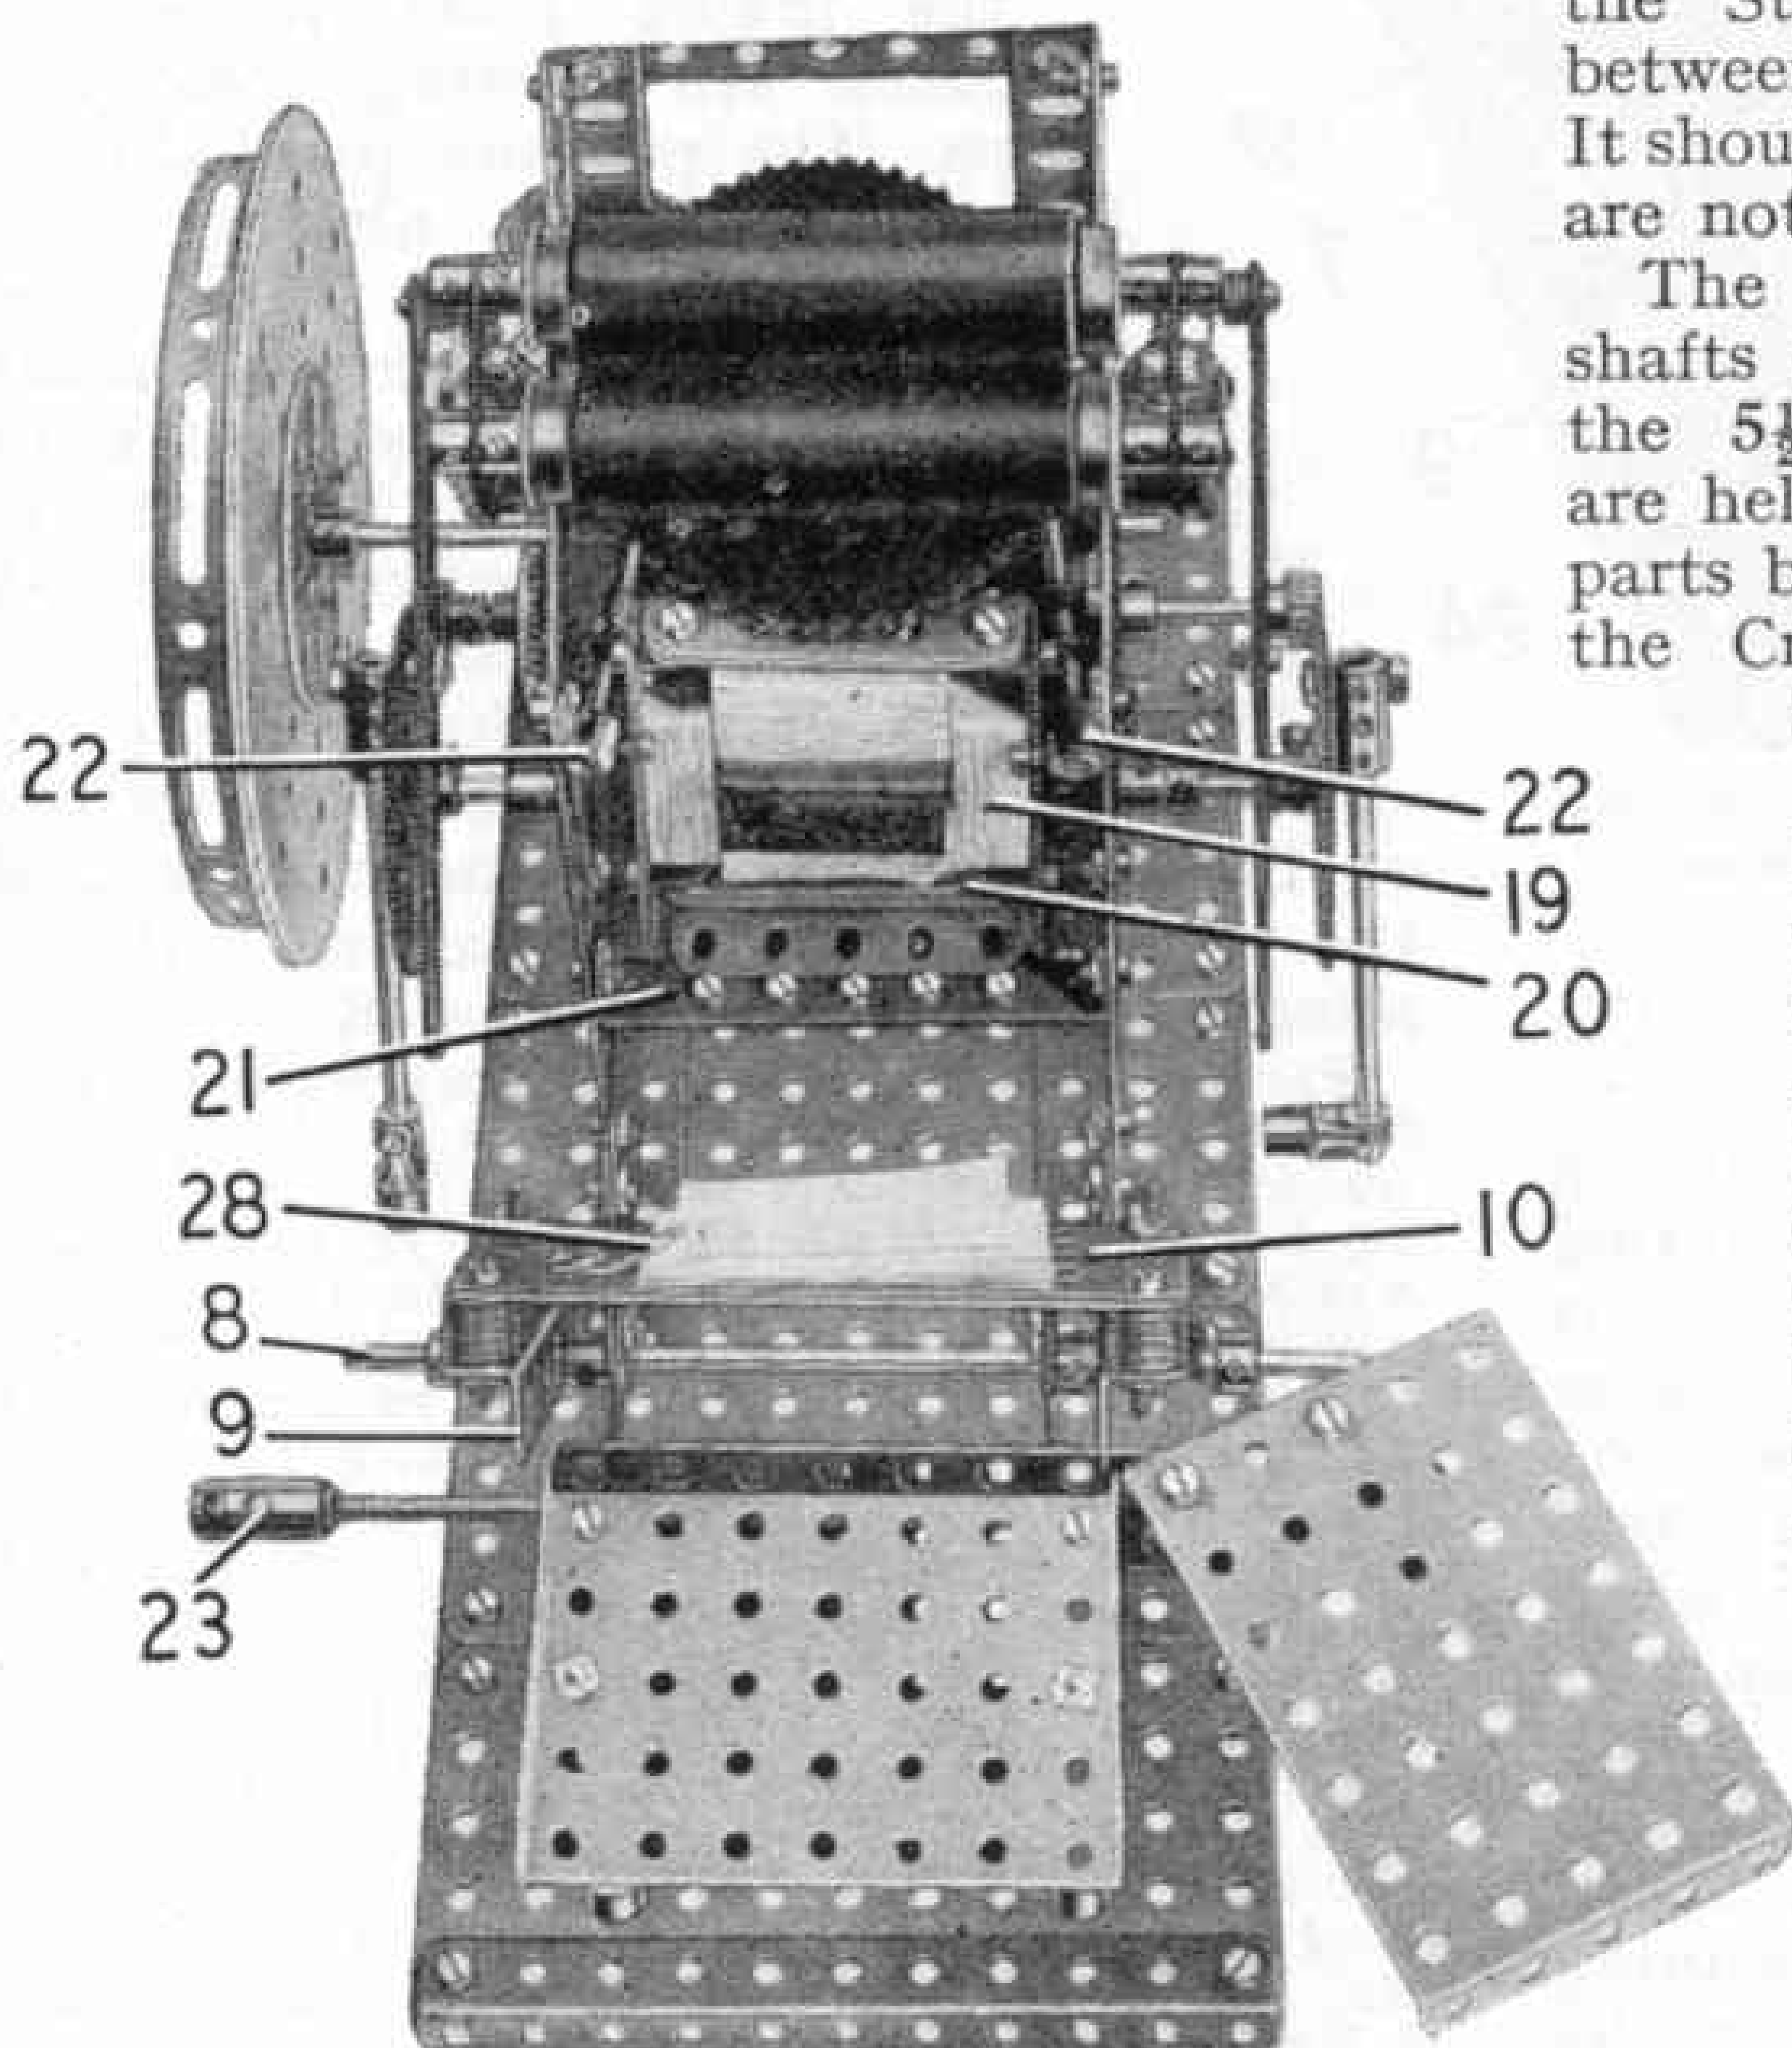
A semi-plan view of the model, showing the type holder and the way in which it is mounted in the machine.
